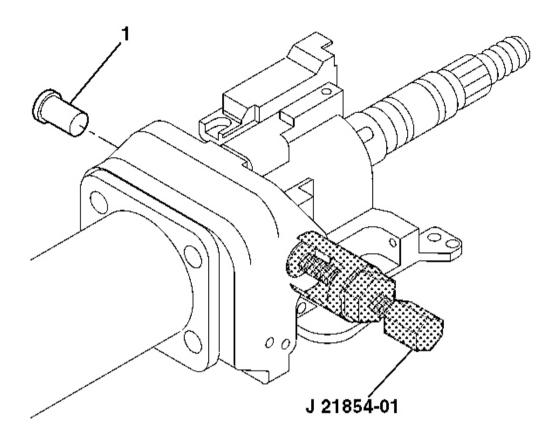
2 Pivot Pins & J 21854-01 Courtesy of GENERAL MOTORS CORP.
